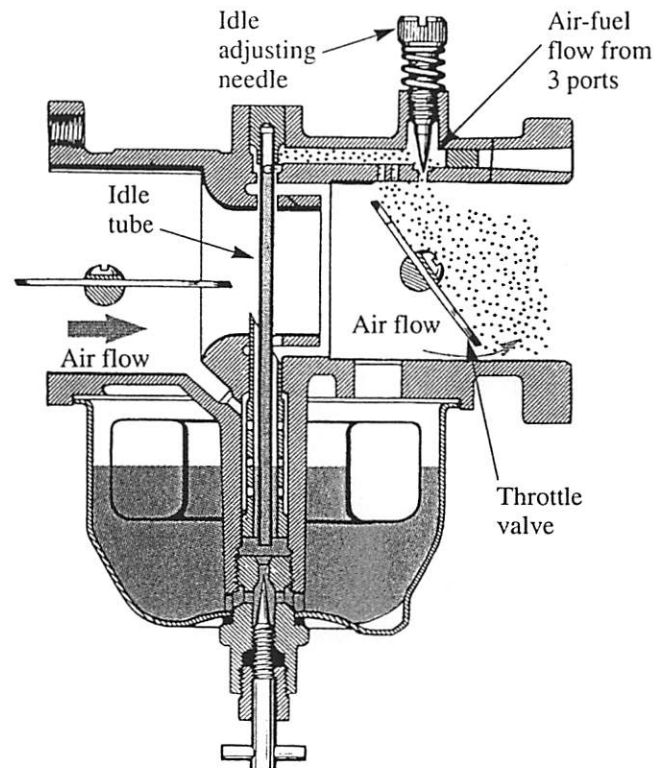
Part throttle. Engine is running from primary and secondary orifices.
